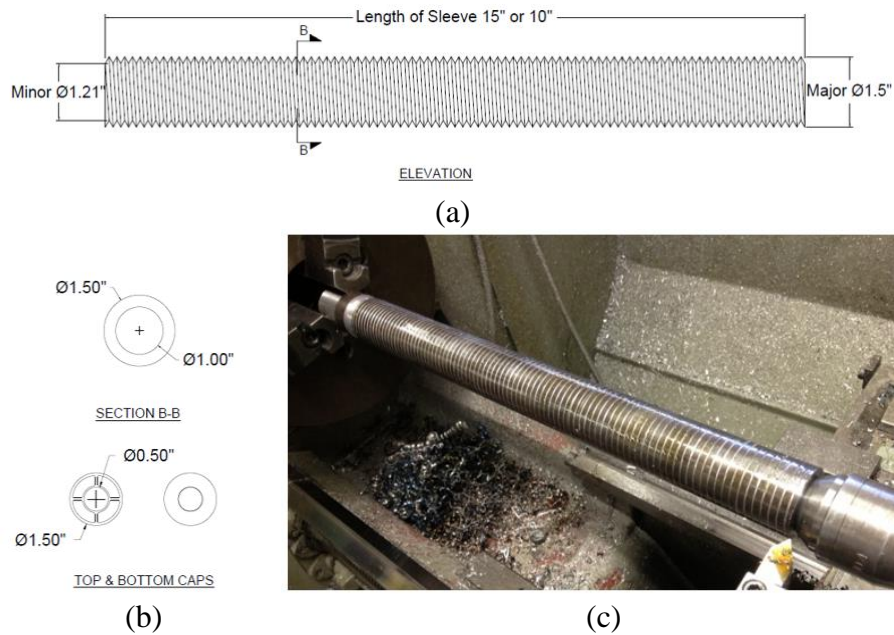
Anchorage Sleeve Details with Epoxy: (a) Steel Sleeve Dimensions, (b) Top and Bottom Caps, and (c) Steel Sleeve Fabrication
